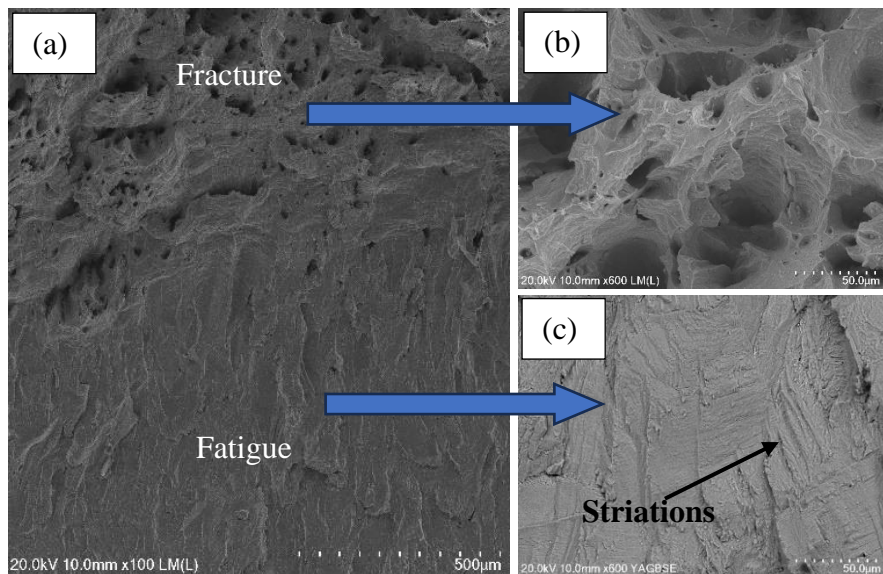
SEM image shows (a) the complete failure surface, (b) the fracture surface and (c) the fatigue surface of specimen FT-4.
